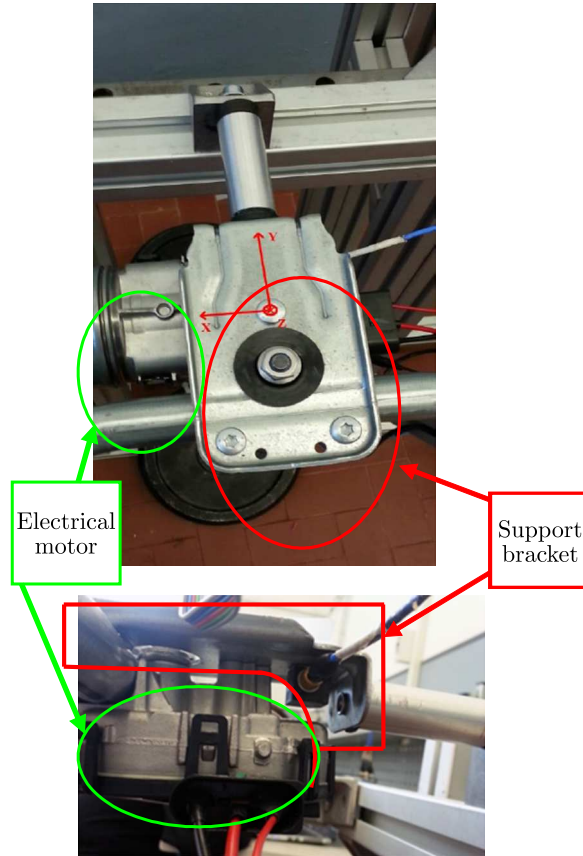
Assembly bracket with an electrical motor. The upper and lateral view
